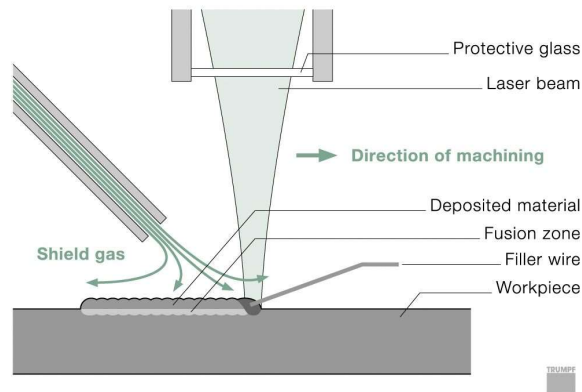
Laser welding with filler wire (TRUMPF Laser- und Systemtechnik GmbH, 2021)
